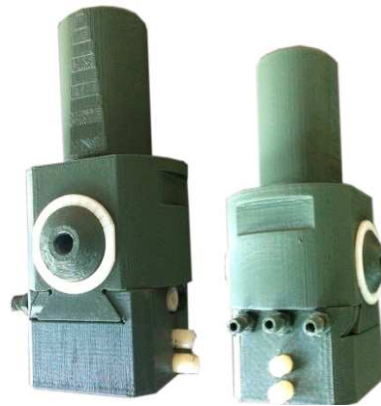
Layout boring chuck with a balancing mechanism in the form of two rings
